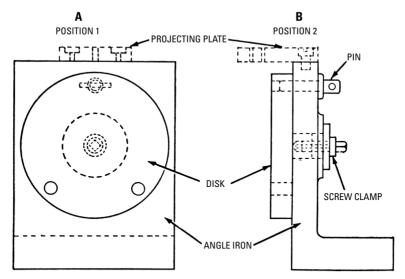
A simple type of indexing fixture that can be used to facilitate machining at accurately spaced angles.
